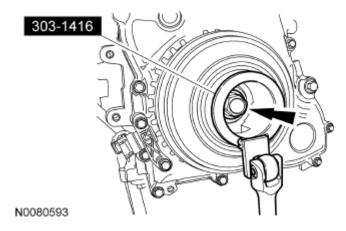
Locating Crankshaft Pulley Bolt Courtesy of FORD MOTOR CO.
